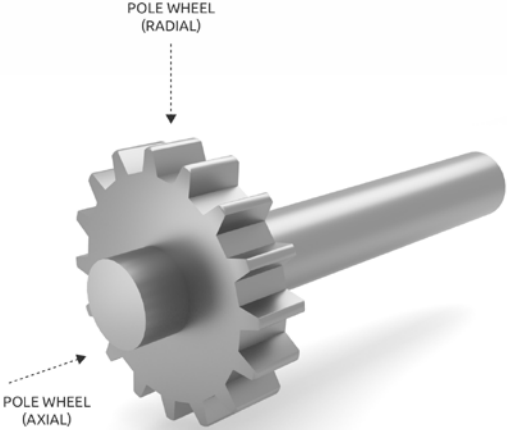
THE RADIAL AND AXIAL MEASUREMENTS ON A POLE WHEEL.
